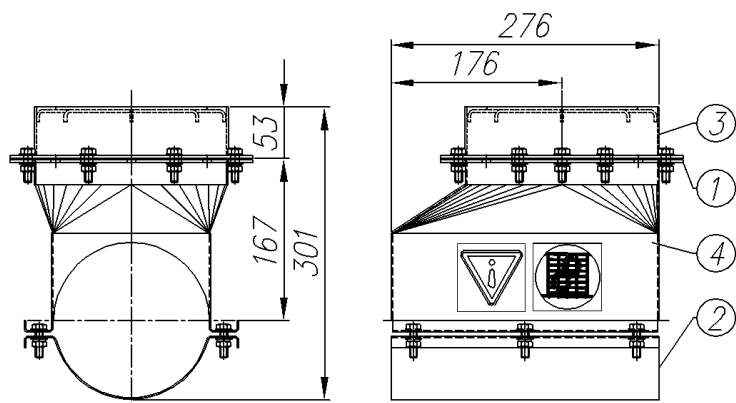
PSU160-I/O-200- inlet/outlet  $\varnothing 200$  for PS160 screw conveyor
